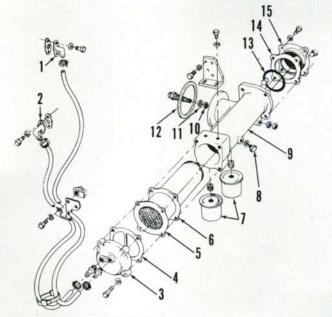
Exploded view of engine oil cooler assembly used on Model TW-35.
